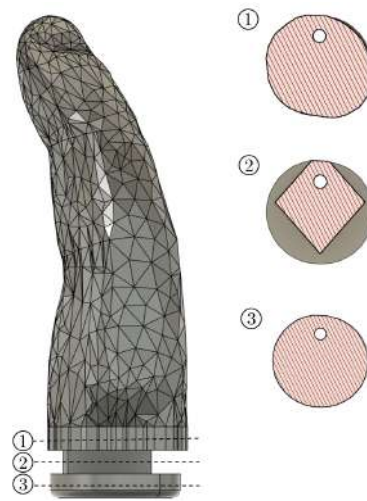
Second prototype of the fitting mechanism with the different transversal sections of the segments that compose this fitting mechanism.
